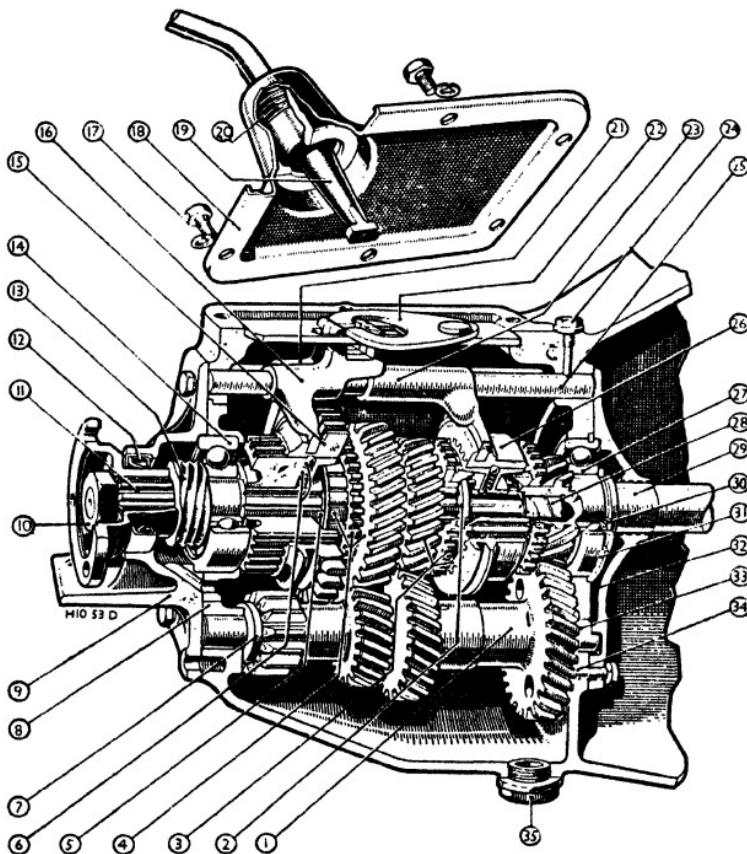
SECTIONAL VIEW OF A TYPICAL SYNCHROMESH GEARBOX WITH FOUR SPEEDS FORWARD AND ONE REVERSE.
